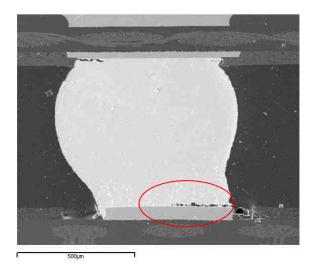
Cross-section of a wbPBGA Solder Joint for Unit 3, Board 12, for Leg 24. The red circle indicates a Solder Joint Crack location
